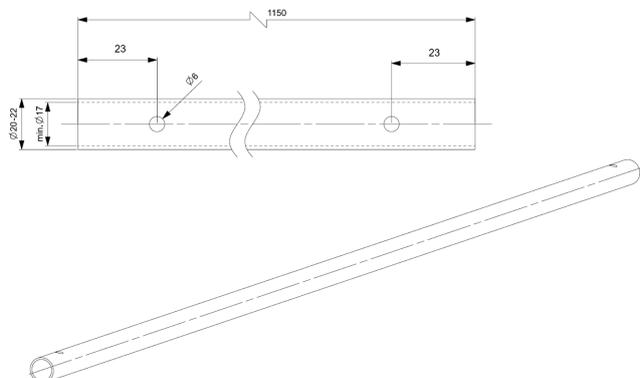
Excerpt from technical drawing Metal tube, showing the position of the holes in the metal tube.
